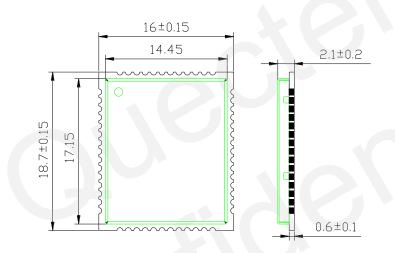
MC60 Top and Side Dimensions (Unit: mm)
